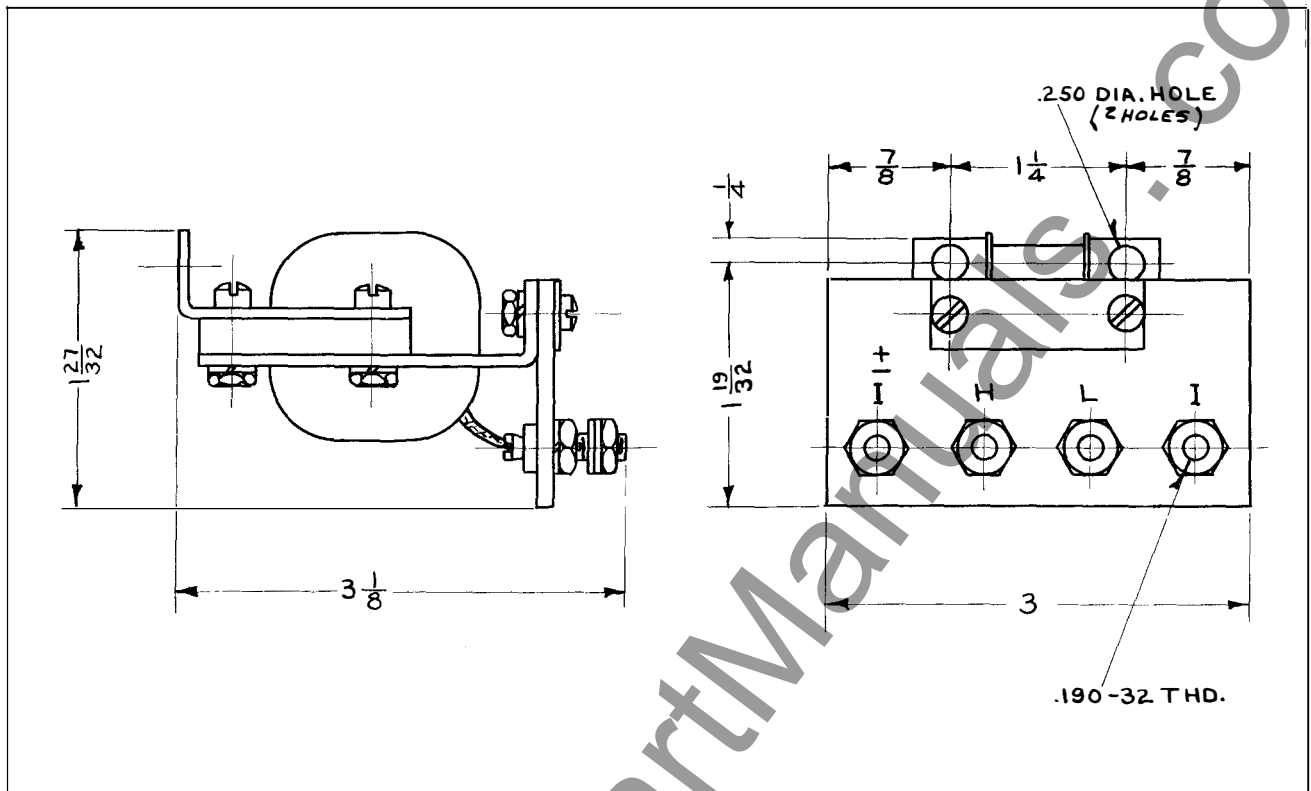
Outline of the Test Milliammeter Auxiliary Transformer. For Reference Only.
